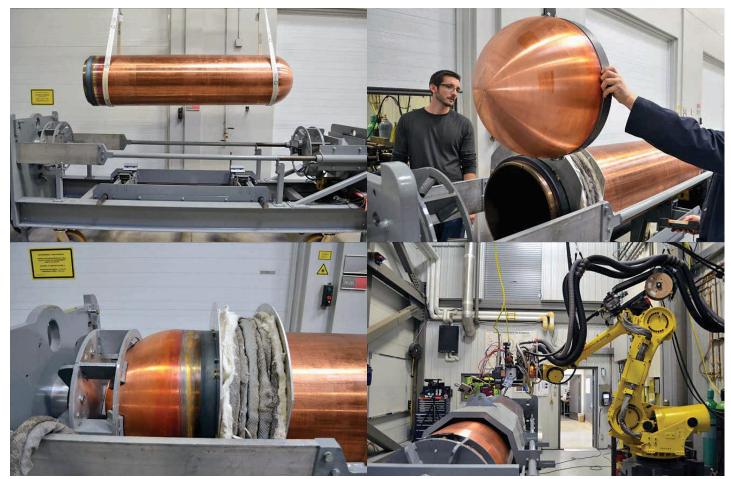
Mark II Used Fuel Container Welding (a) Loading container into scissor lift (b) Loading upper hemi-head into position (c) End-clamping of container and positioning of non-contact induction heater (d) Welding with splatter guards in place.
